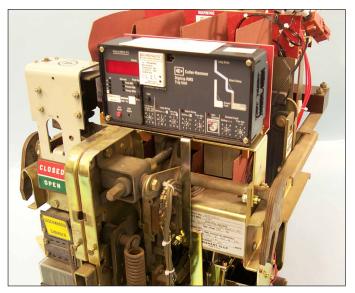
Overview: Trip Unit Assembly Installed on the Breaker.
